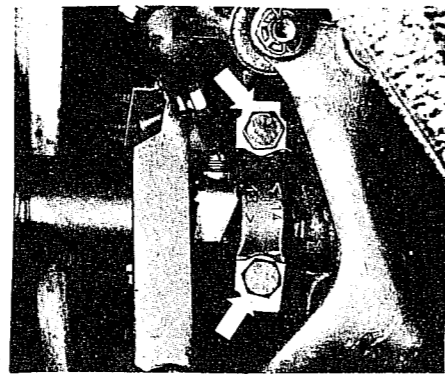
Steering column mounting bracket. Locking plates arrowed.
